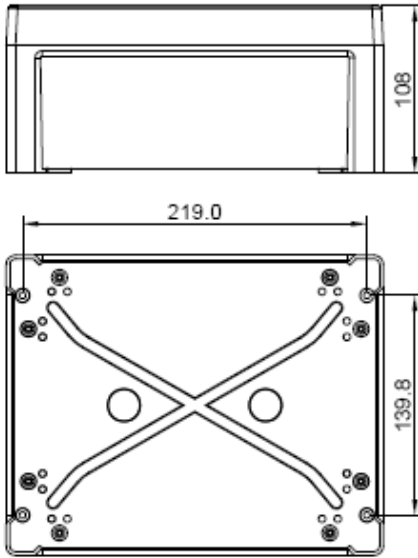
Single Horn Control Unit mounting Installation A131xxxxxG1
